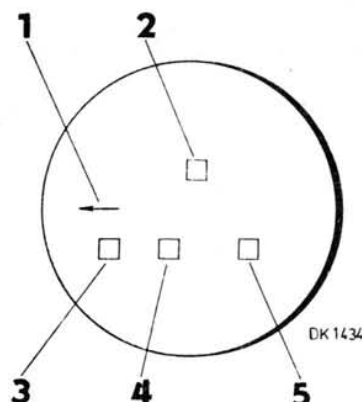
/1 - Classification Code on Piston Head - Key to Symbols:
